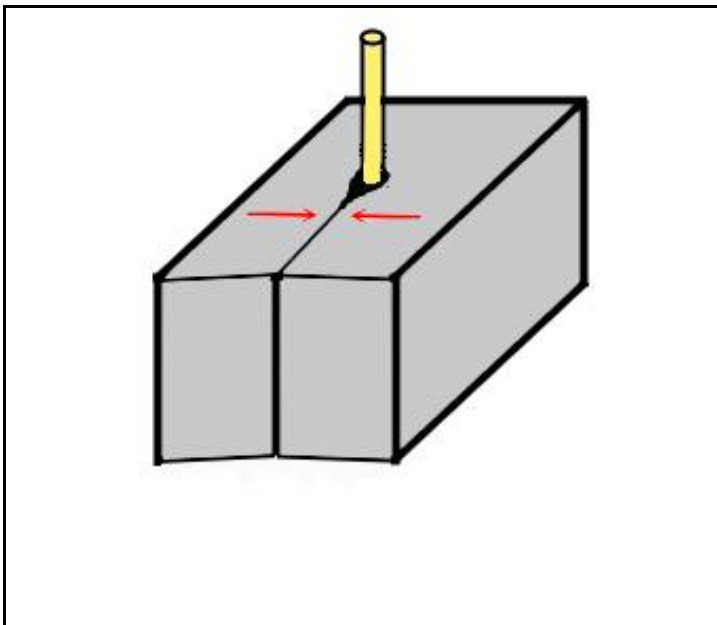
Illustration showing the castings pinching back on itself after being cut by the wire EDM
